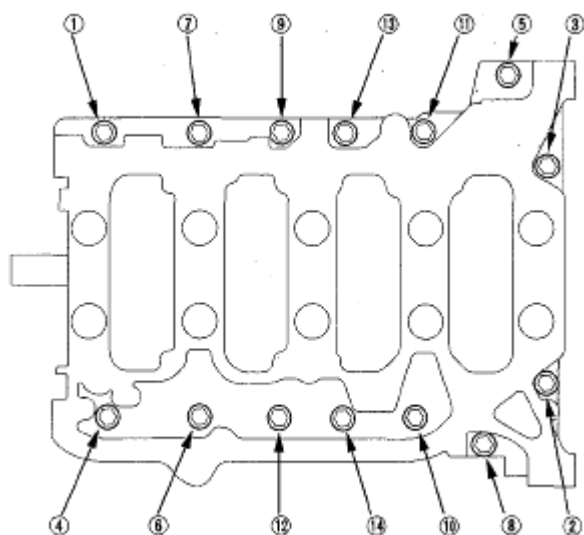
Identifying Lower Block Bolts Criss-Cross Pattern
